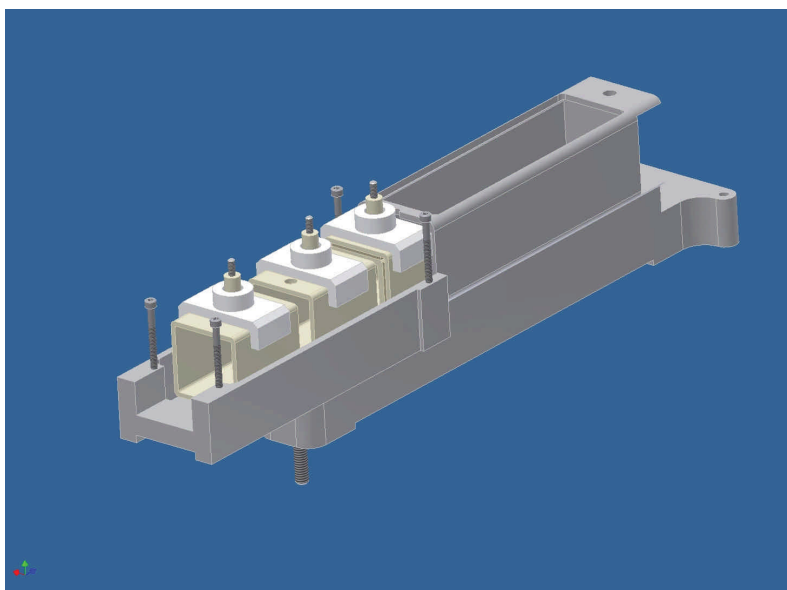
CAD drawing of the detector condenser lens; the top cover has been removed from the lens, and the detector is not shown in the housing.
